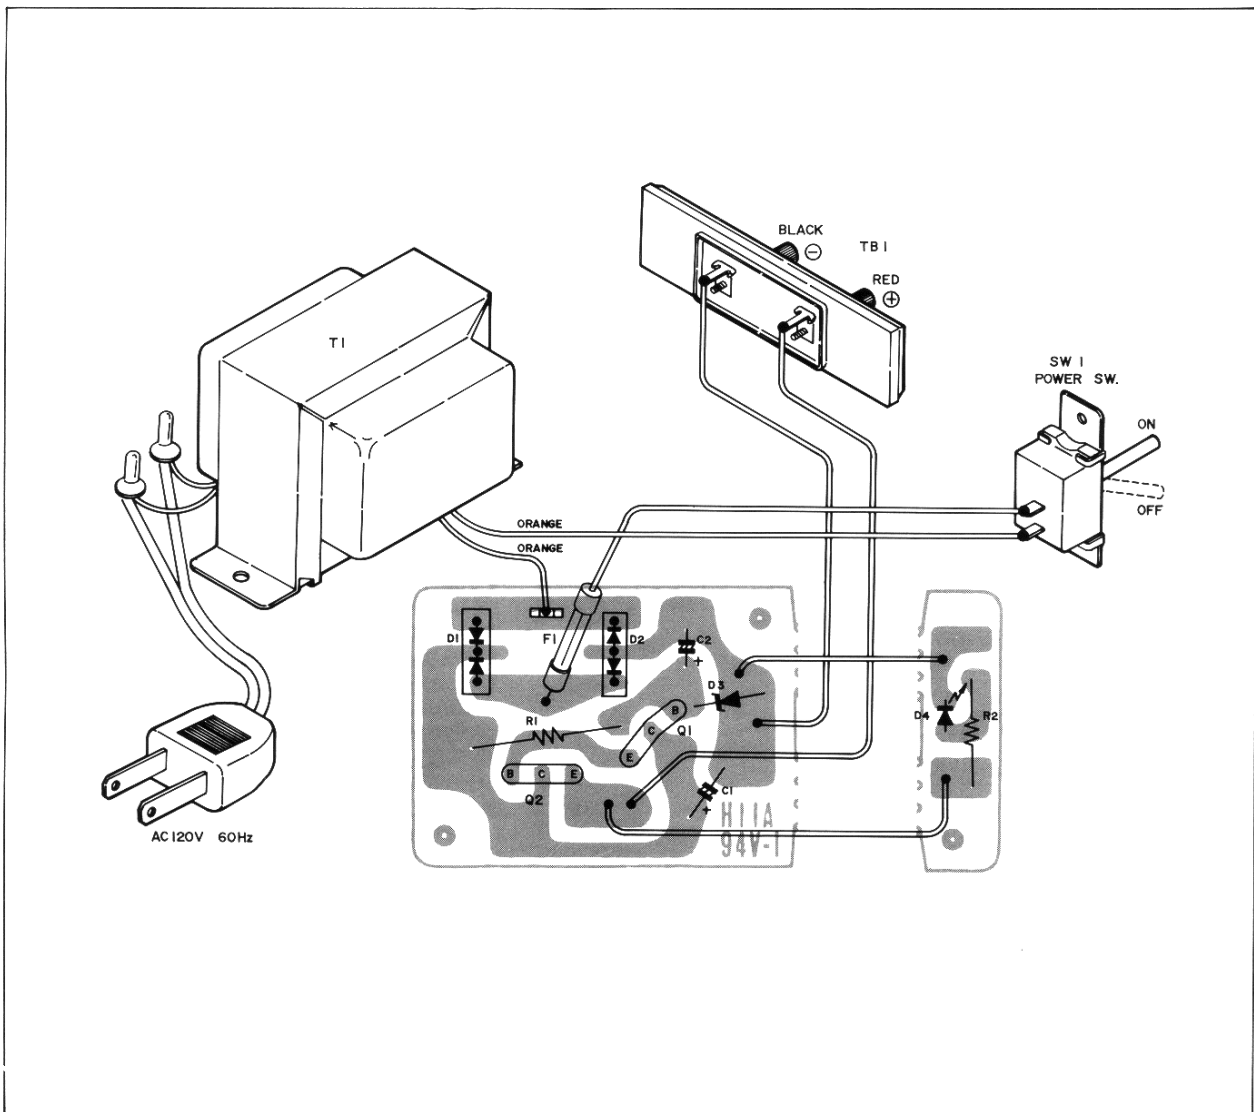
WIRING SIDE OF P.W. BOARD (AD-111)
